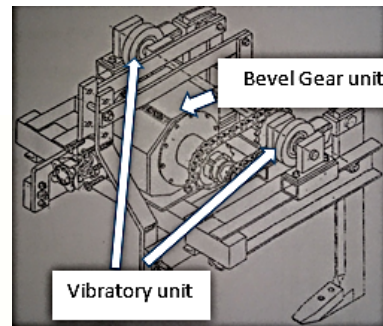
Isometric drawing for Double Shank Vibrating Subsoiler. Source: ธิญา และคณะ (2539)
